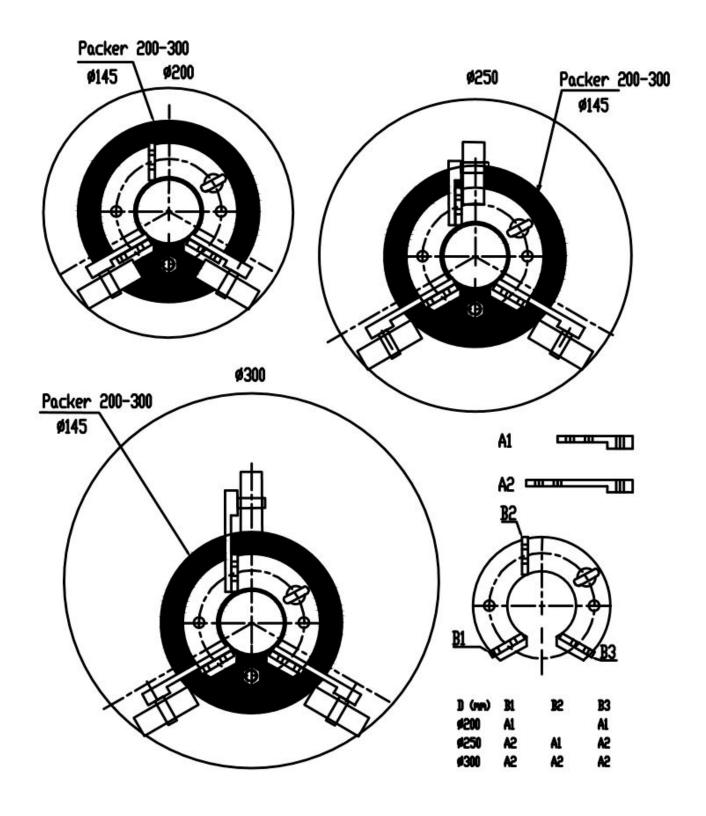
Outline of wheel assembly with a flexible packer 20-30
